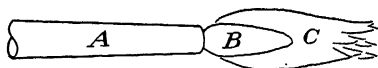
A, welding tip; B, inner cone of flame; C, heavy feathered edge.
